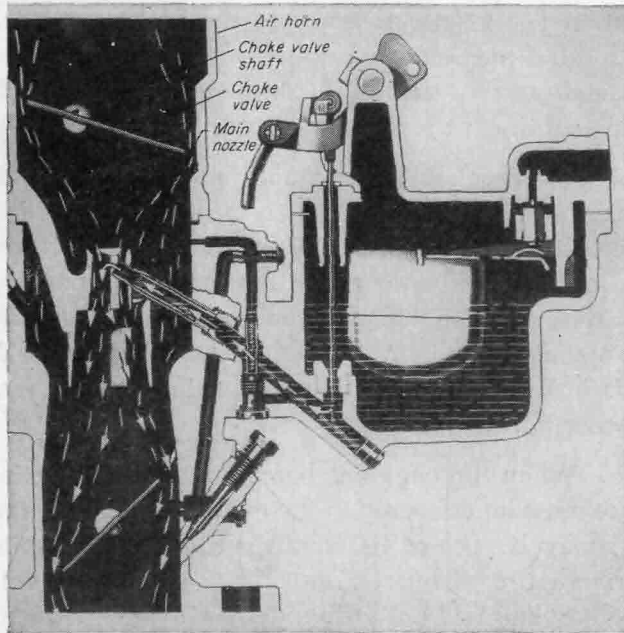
Operation of choke when starting engine. (Chevrolet Motor Division of General Motors Corporation)
